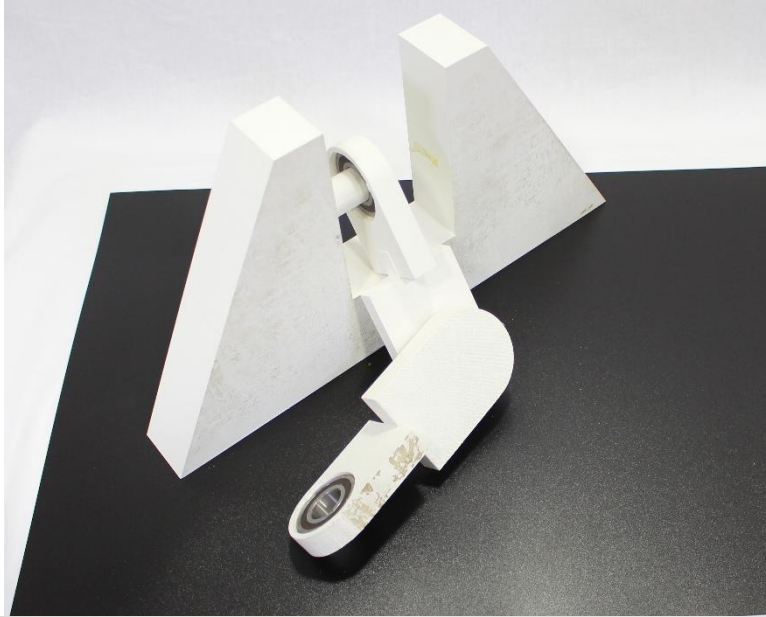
Pitch rotation check of Dual Axis one way bearing systems- mark 3-assembly type 2
